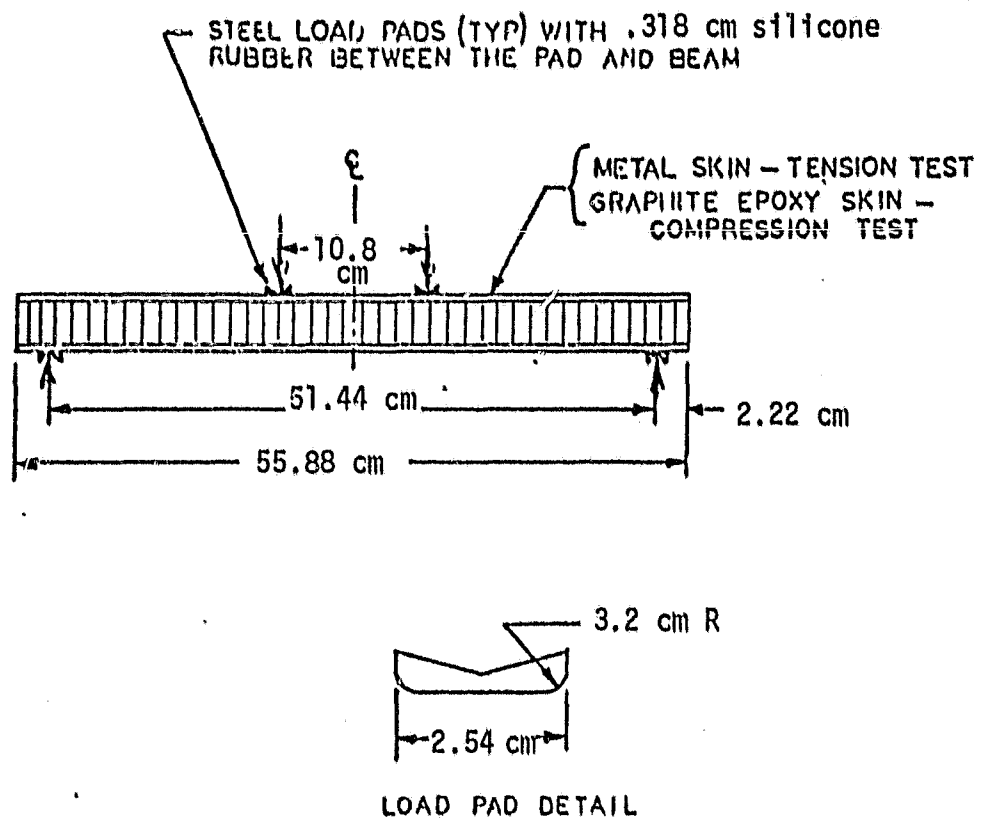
SANDWICH BEAM SPECIMEN TEST SET-UP
